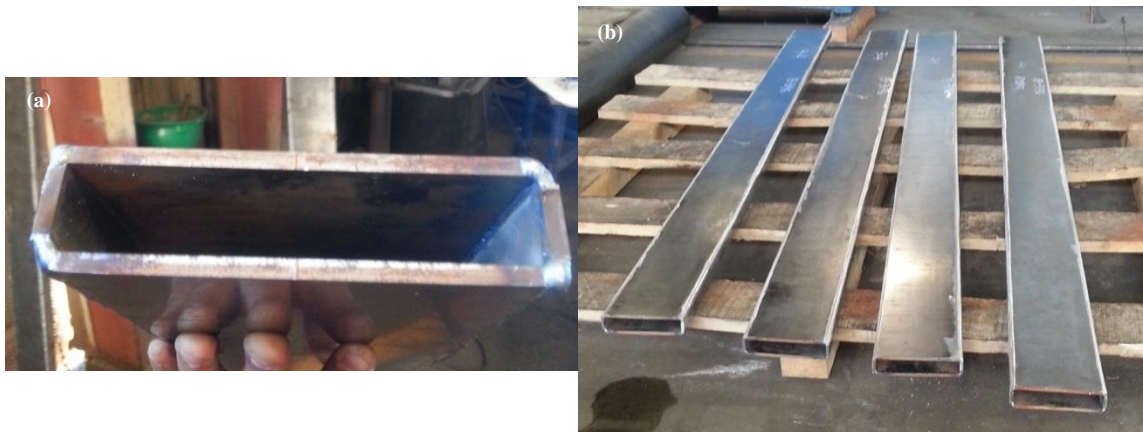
Risers assembly at the fabrication shop: (a) The cross section of one of the risers, (b) All four risers.
